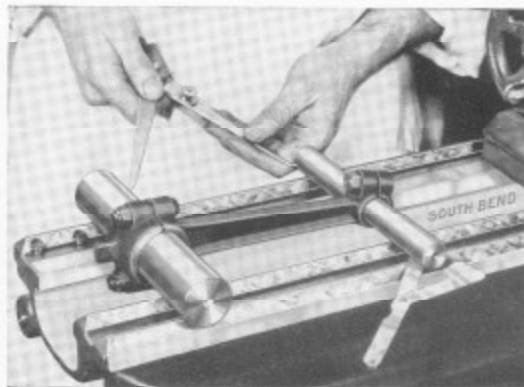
Testing connecting rod for alignment and twist, using test bars across V-ways of lathe bed.
